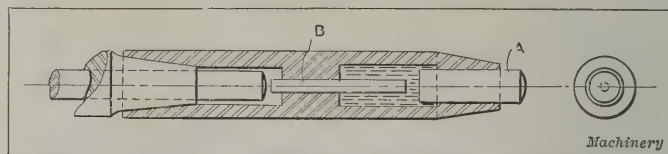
A Multiplying Attachment for the Indicator shown in Fig. 2
